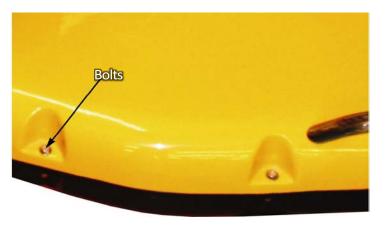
Removing 7/16 and ½ Inch Bolts and Nuts
